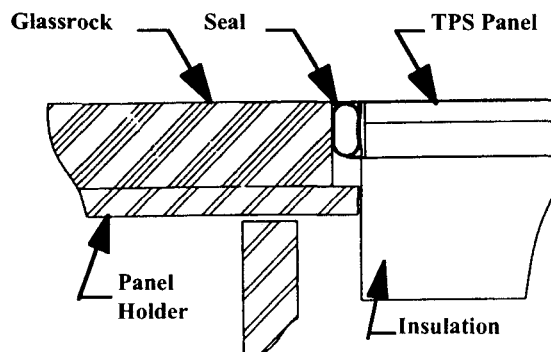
Side and trailing edge seals between TPS test panel array and panel holder.
